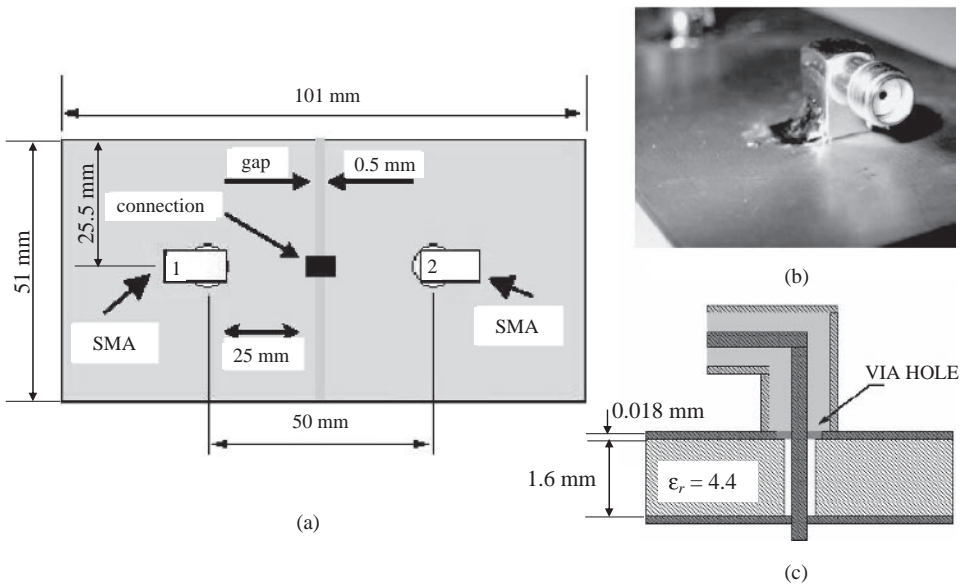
Test board with a gap in the power plane: (a) PCB layout; (b) SMA connector attached to the PCB board; (c) SMA connector cut view
